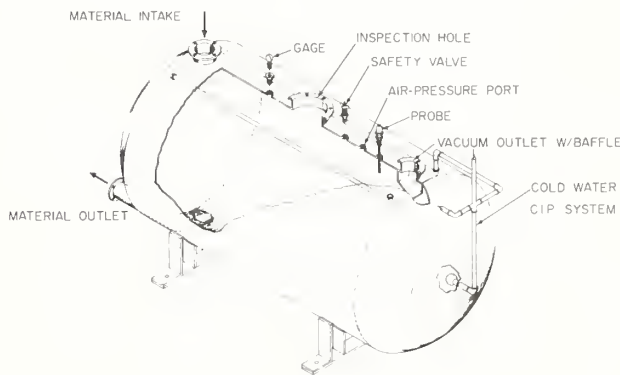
Cutaway view of the experimental collection and storage tank for system A.
